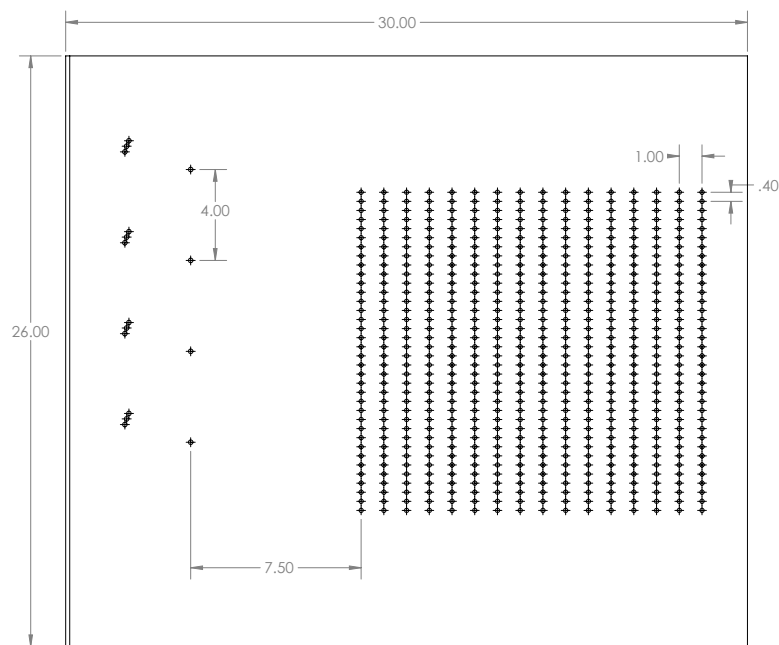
Dimensioned drawing of the plate used in the wind tunnel experiments. All dimensions are in inches. The plate had a thickness of 3/16".
